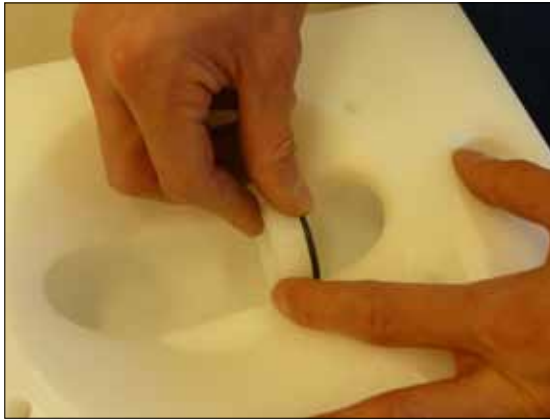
Mount the diaphragm shaft (16) on the diaphragm (15) and push the assembly carefully through the hole in the centerblock (12).
